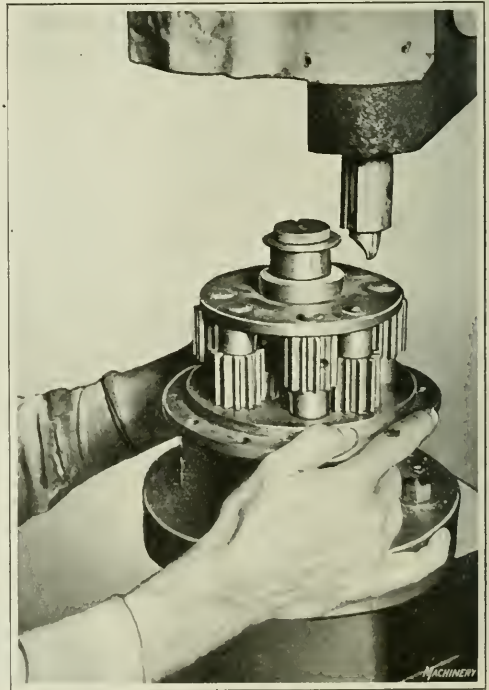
Riveting Pins in Gear-case on a Power Riveting Machine
